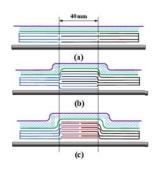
Joint group 2: (a) laminated joint-1, (b) laminated joint-2, and (d) multi-overlapped joint
